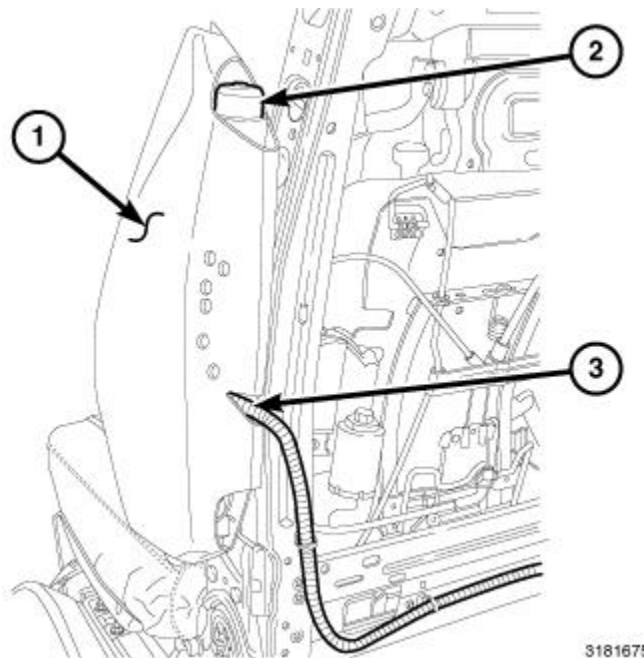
Chute, SAB Jumper Wire Harness & SAB Inflator
